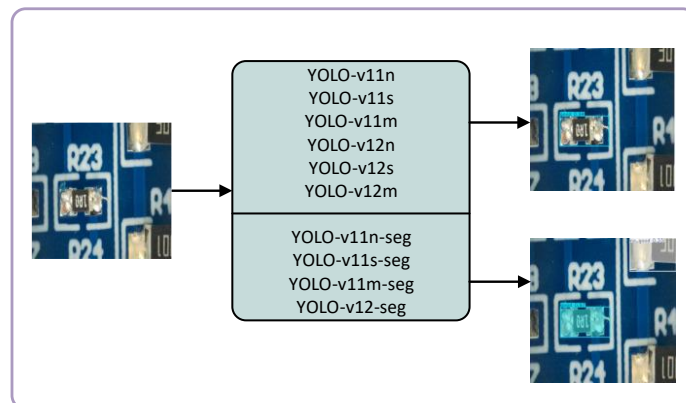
Performance evaluation of YOLOv11 and YOLOv12 for PCB solder defect detection
